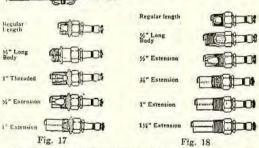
18"-18 (threads per inch) thread spark plugs with different length of body or shell.
